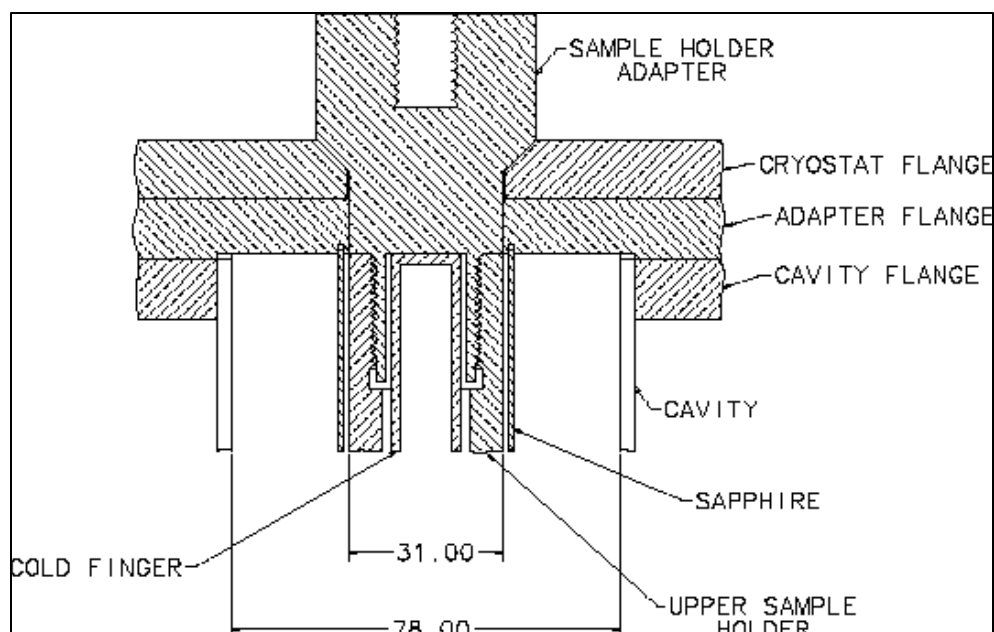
Host cavity assembly including sapphire bore, sample-holder, adaptor flanges, cryostat top and bottom flanges and input/output couplers. Zoom into top section (all measures in mm).
